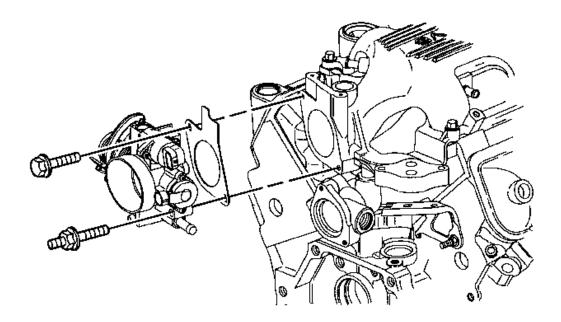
Throttle Body Courtesy of GENERAL MOTORS CORP.
